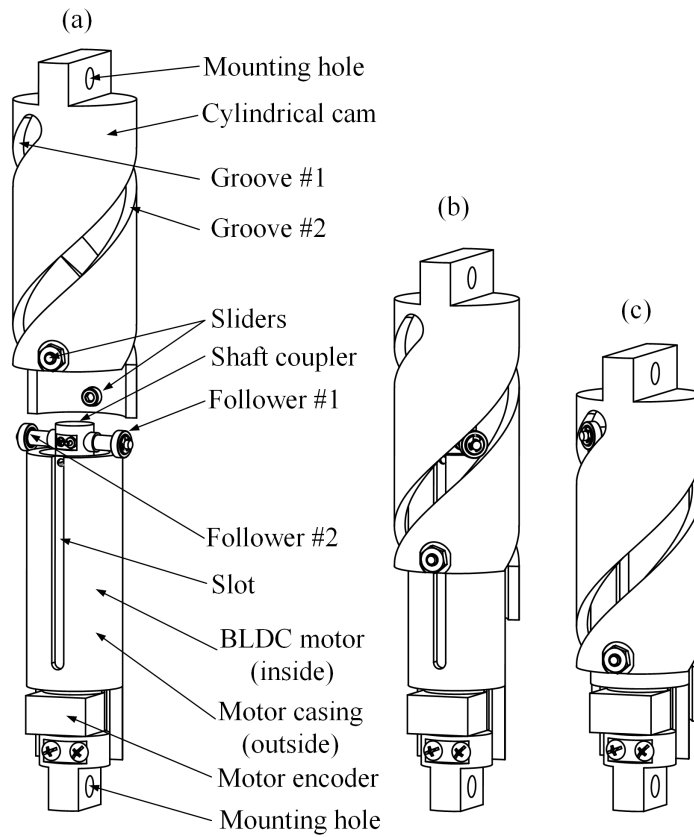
Schematic view of the cylindrical cam actuator, (a) extended view, (b) in the middle of travel, (c) compressed view
